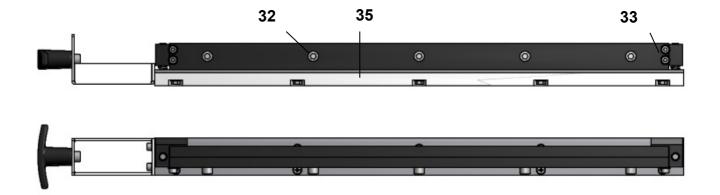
Perforating tool 2:1- 9 TPI (571 40 465a) – standard equipment. Micro-perforating tool (571 40 464) as optional accessory.
